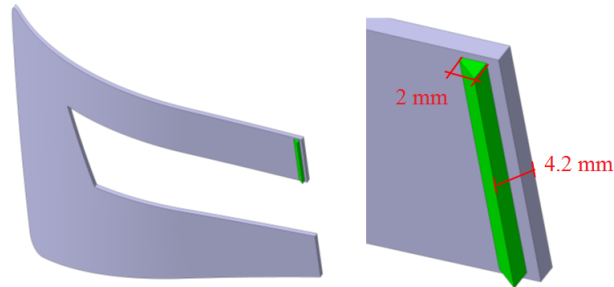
Dimensions and position of prism, situated on the edge of A surface of Milky filter
